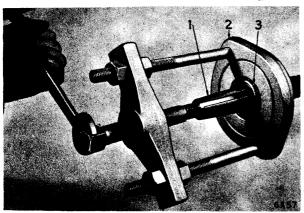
Removing Bearing from Axle Drive Shaft (Puller C-293C-1)
